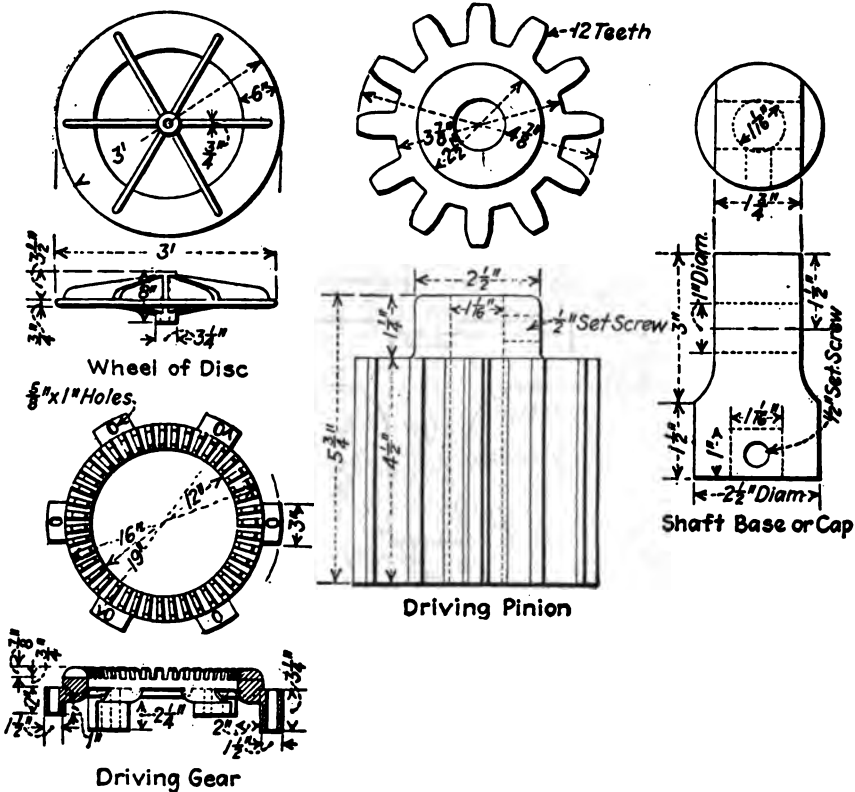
Details of disk, driving gear and pinion, and shaft cap used in rotating-disk method.
